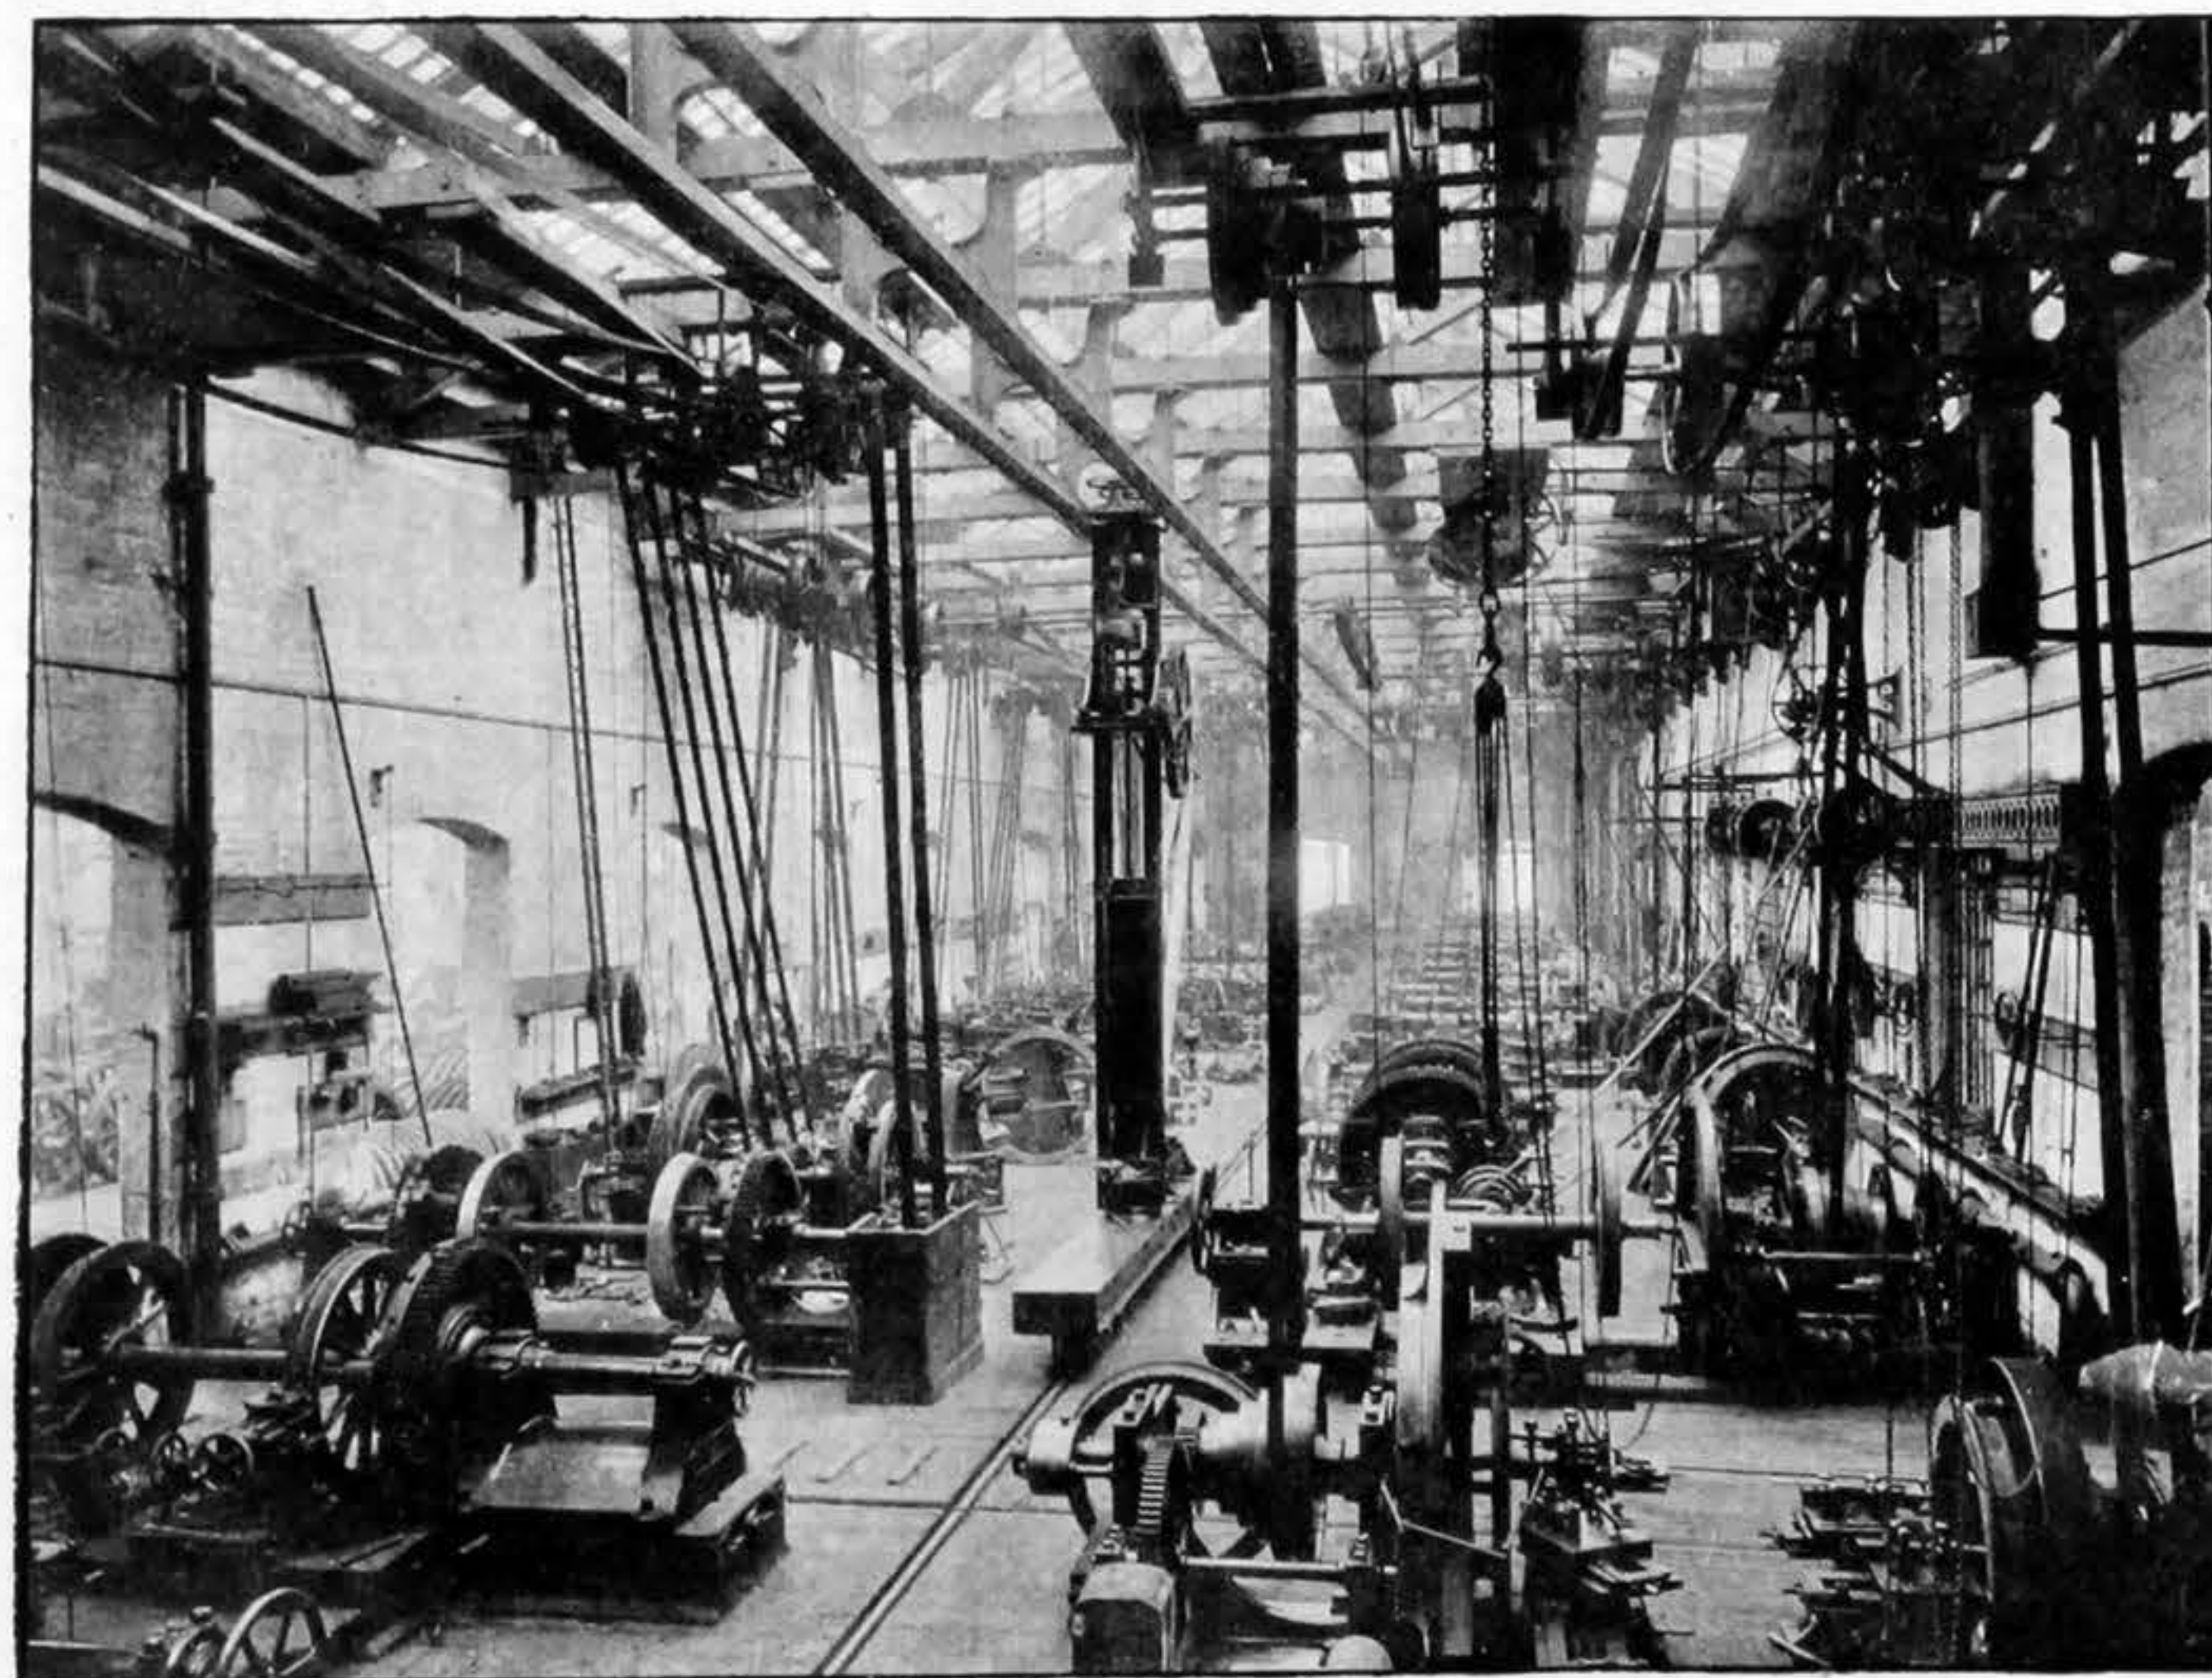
WHEEL SHOP, SHOWING WALKING CRANE
